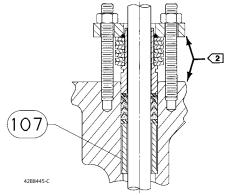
Typical ENVIRO-SEAL Rotary Packing Arrangements with PTFE Packing for Fisher Vee-Ball, Eccentric Plug, A41, and 8560 Valves
